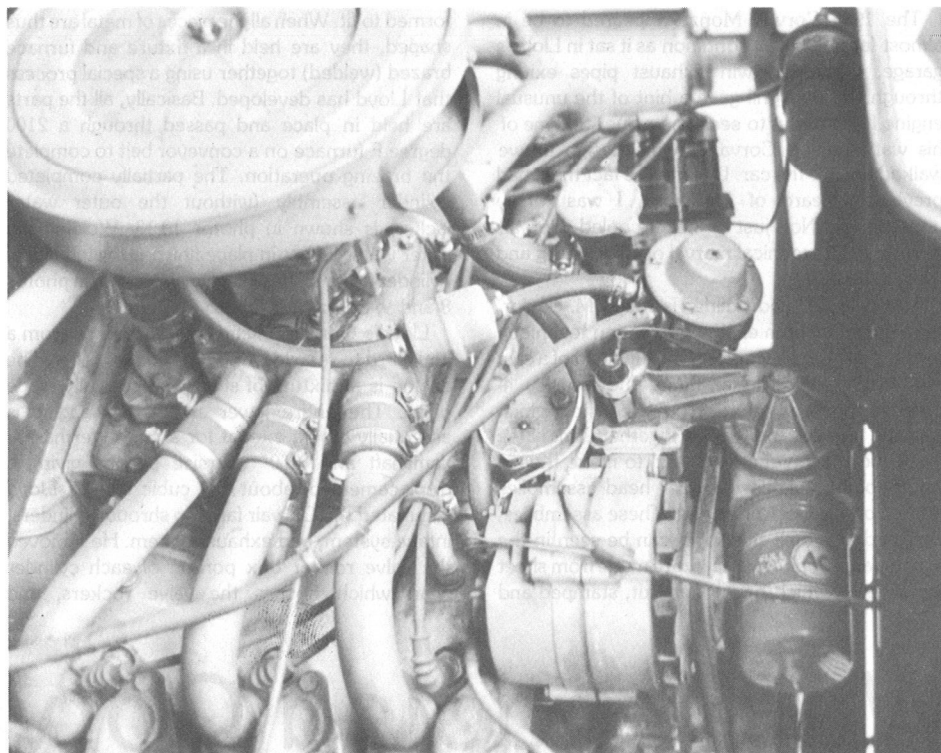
Showing the water-cooled Corvair engine. Note the specially fabricated six-runner intake manifold with centrally mounted two-barrel carburetor. The alternator has been repositioned. The water return to the radiator from the water-heated intake manifold can be seen just below and to the left of the air cleaner. (Bob Helt photo)
